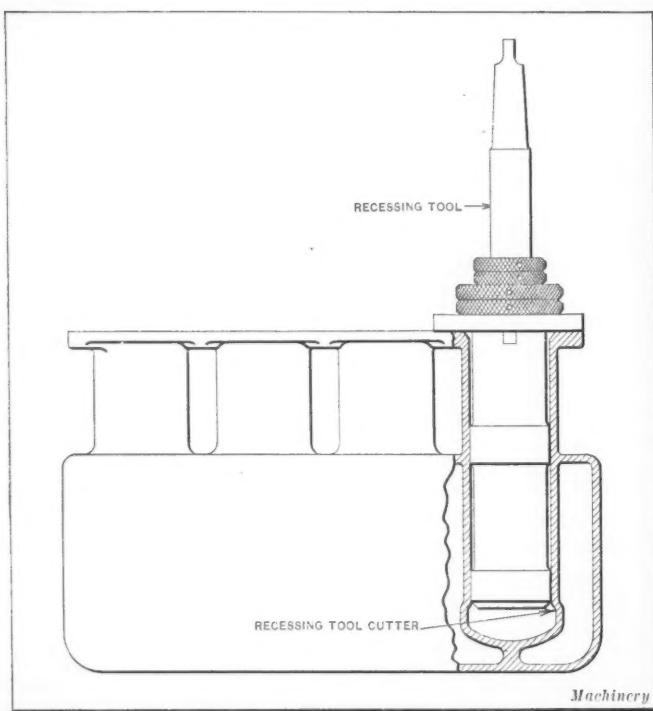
Tool for recessing End of Automobile Engine Cylinders in Operation
